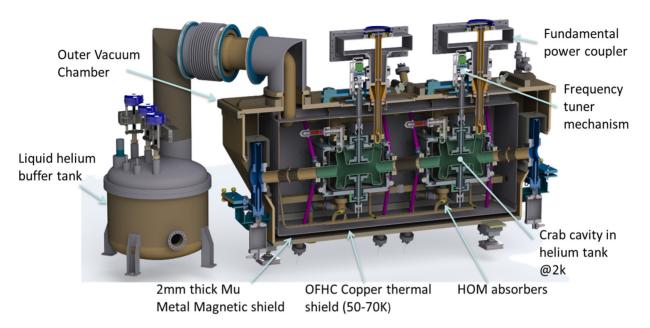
DQW Crab Cavity SPS Cryomodule cross section view.
